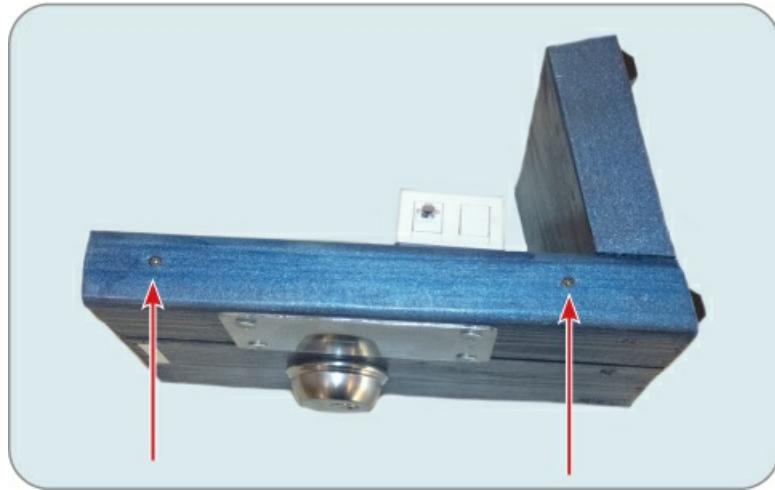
Two 6" screws securing the 2"×4" board to the 2"×6" board on a completed stand
